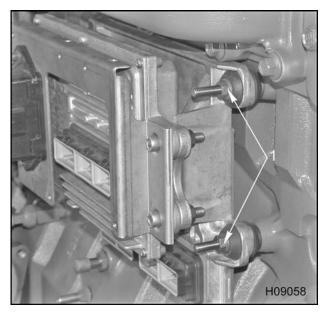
ECM, IDM, and EGR drive module assembly (side view)
